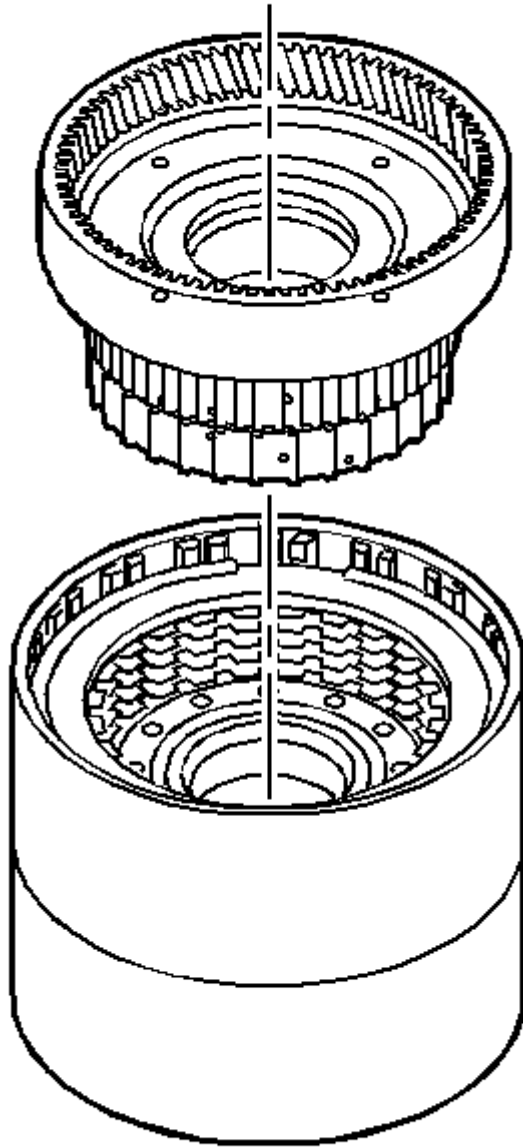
Locating Coast Clutch Hub With The Thrust Bearing
